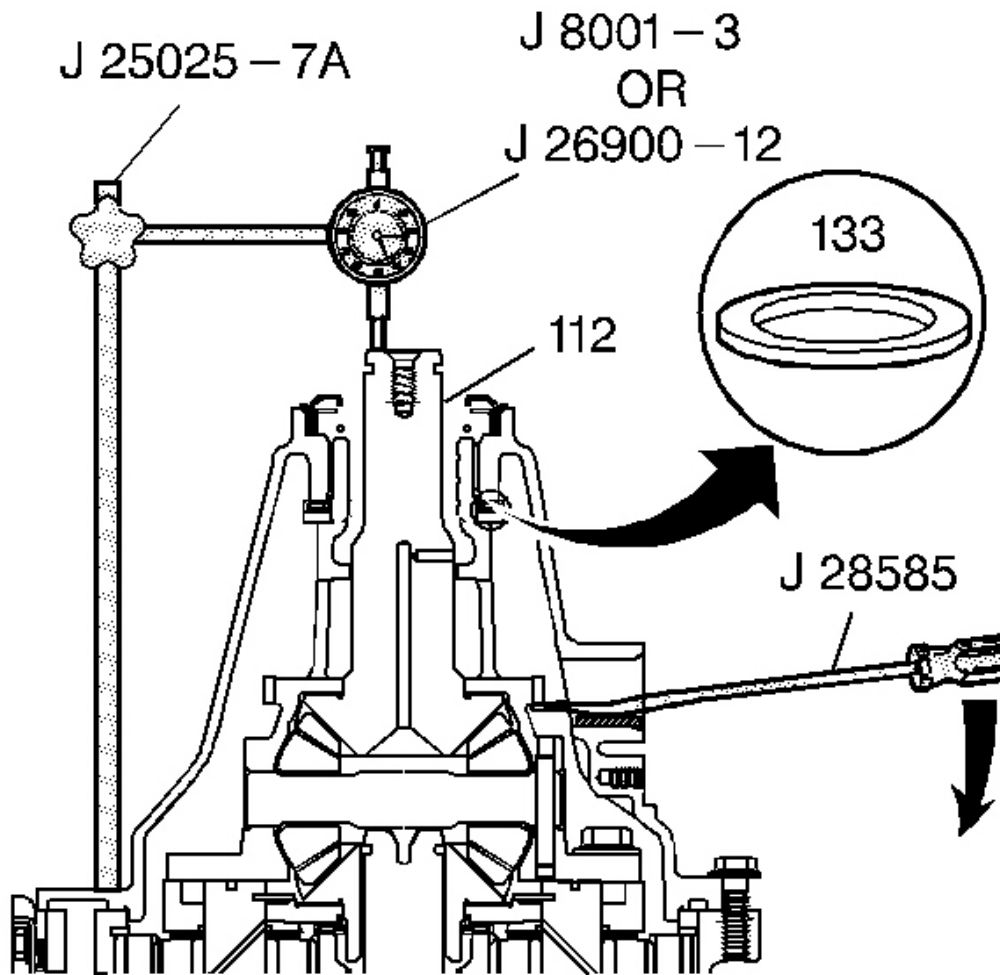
Measuring End Play Clearance Using J 25025-7A, J 8001, & J 28585
